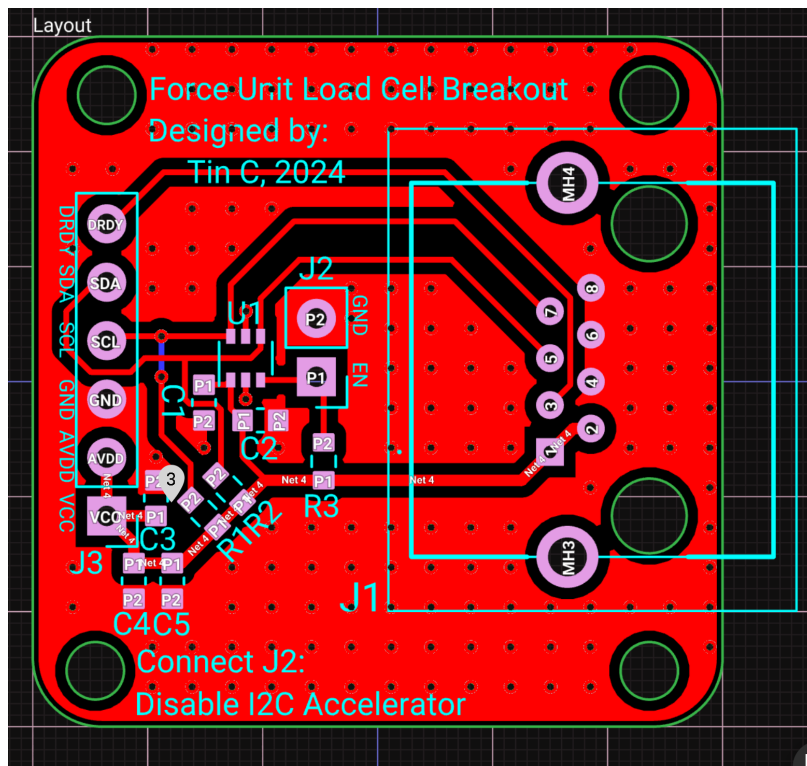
Force Sensor System Breakout Board Layout - Top Layer
